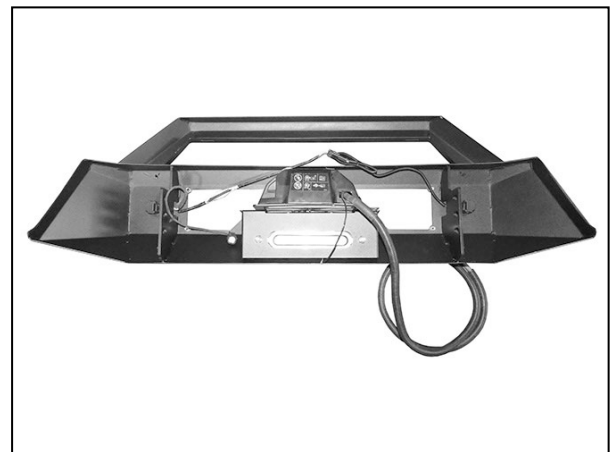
Attach Skid Plate Bracket over Winch Tray Bracket. Driver/left side of Assembly pictured
